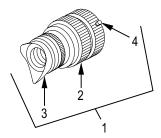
Optical Eyepiece Assembly (Night Vision), 93143-300.
